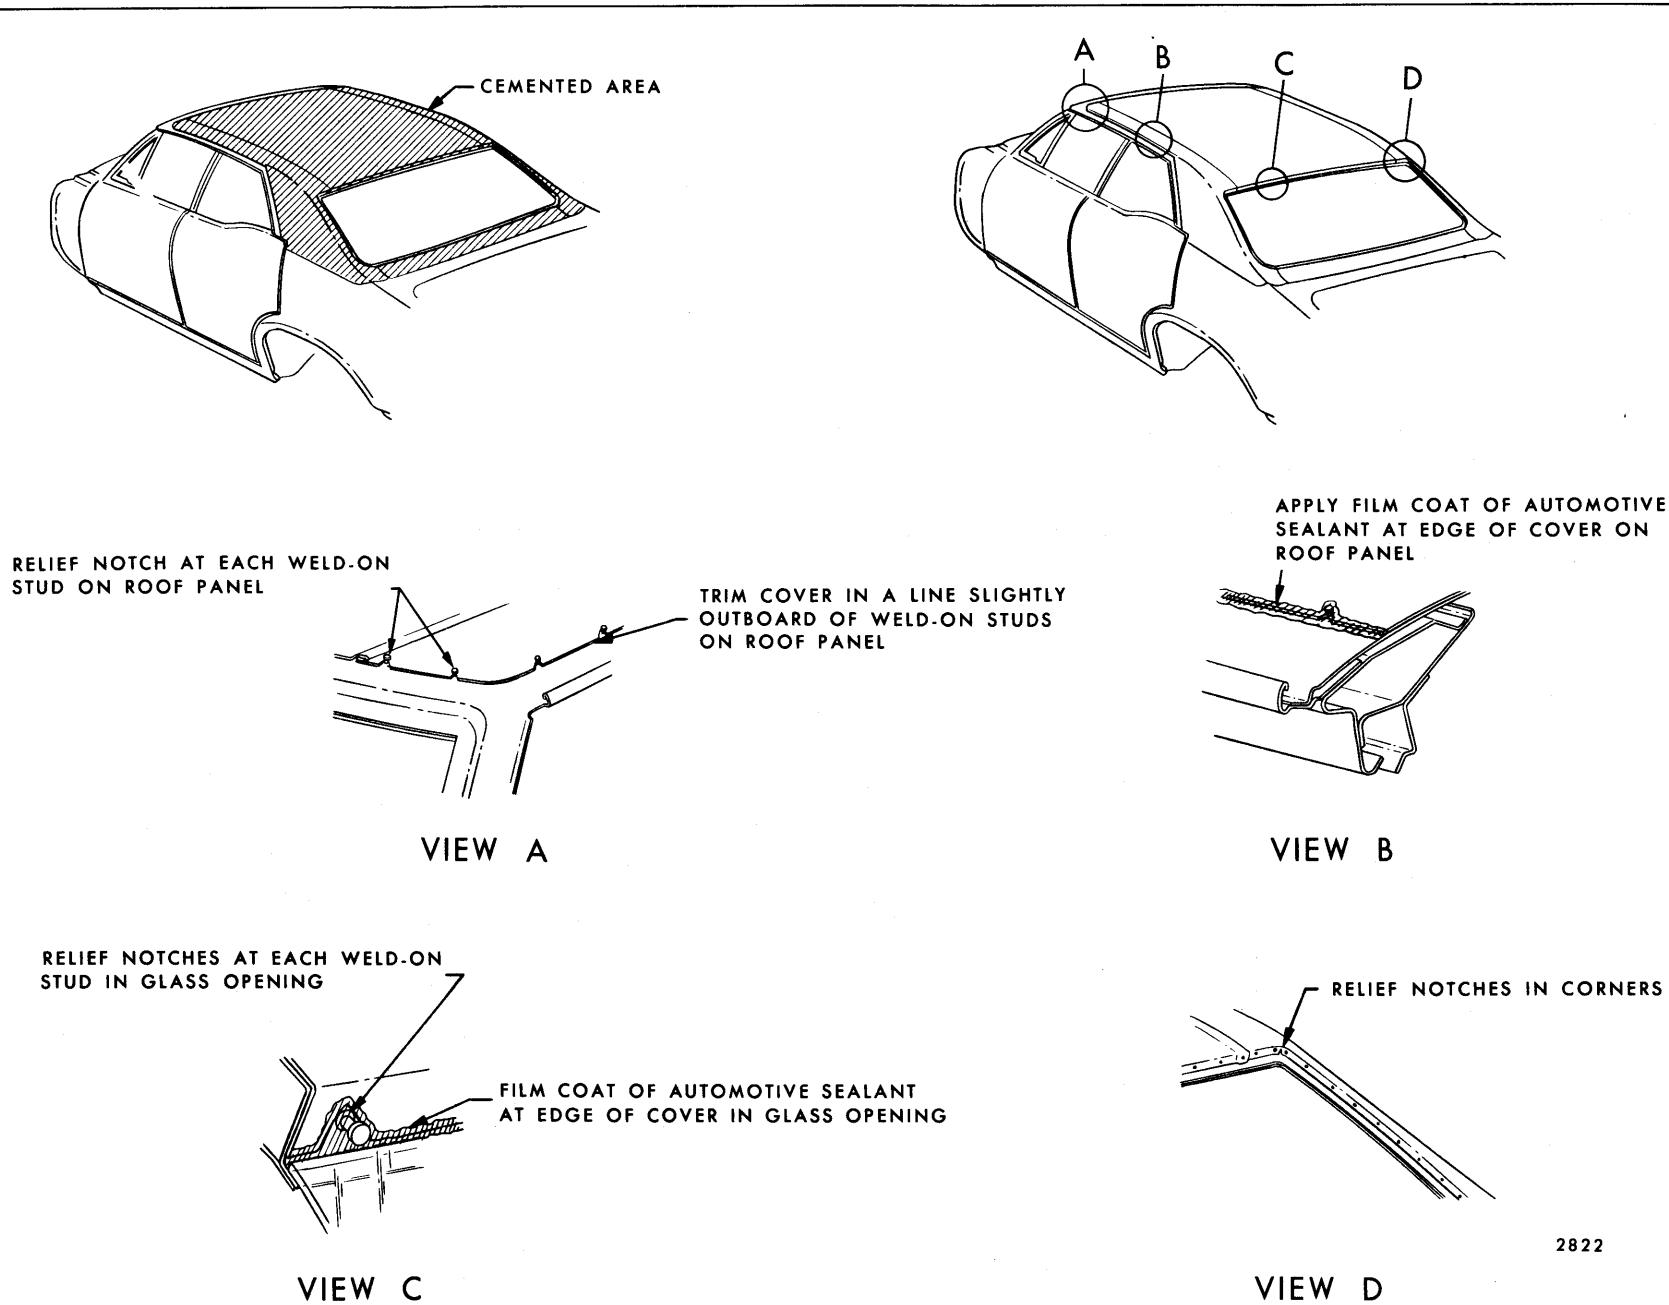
Typical Fabric Roof Cover Installation with Roof Panel Moldings and without Pod
